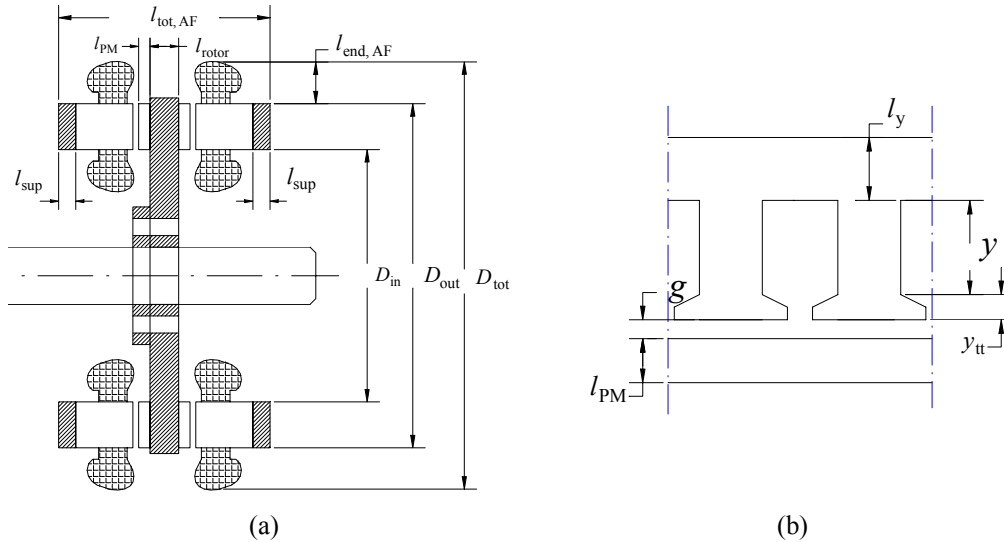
Definitions for the geometrical dimensions of an axial-flux machine with one-rotor-two-stator configuration. (a) External dimensions. (b) Stator cross-sectional dimensions.
